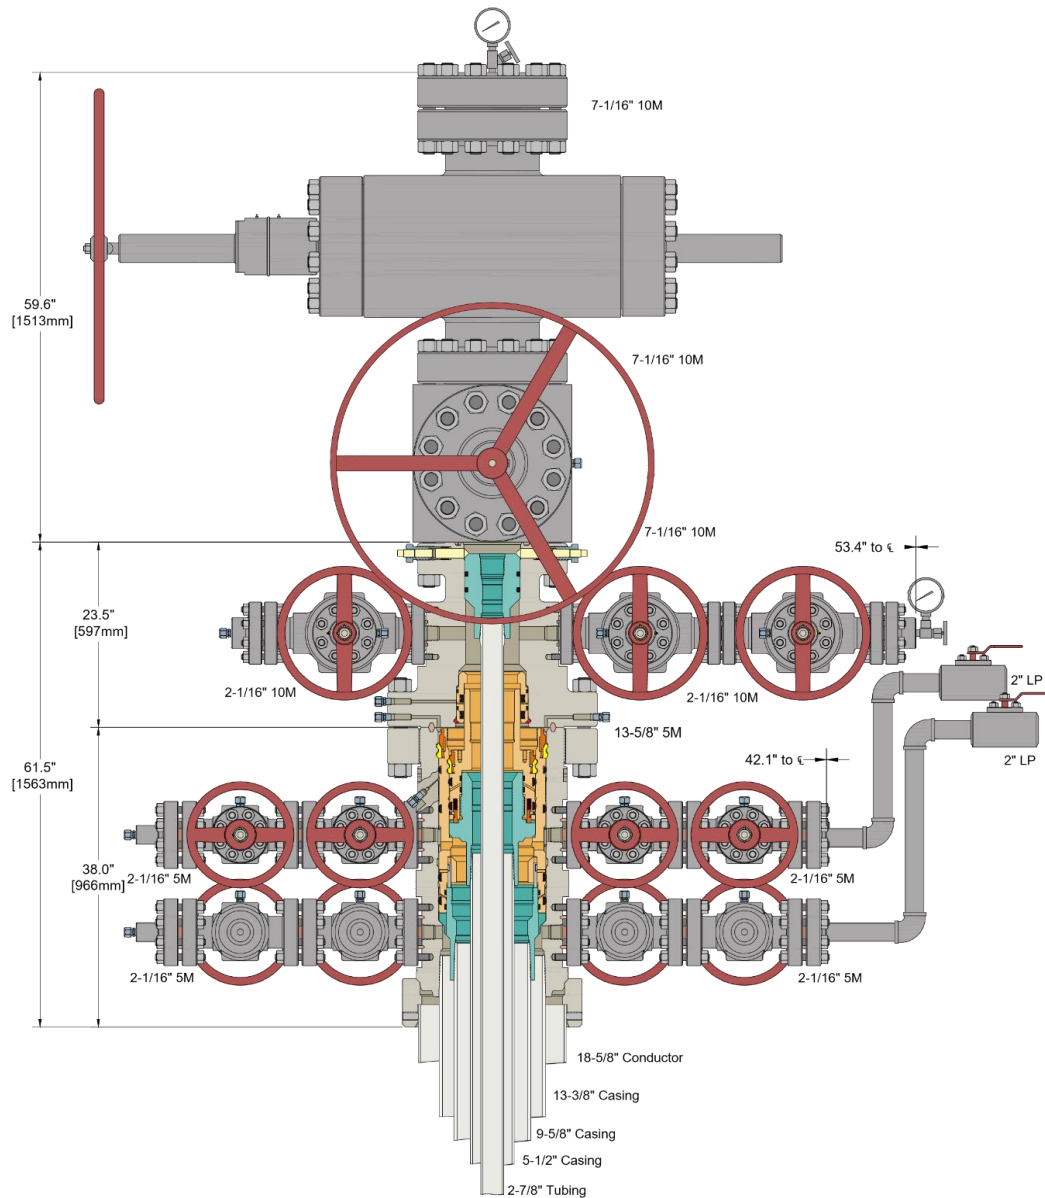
Velkerri 76 S2-1 installed wellhead equipment schematic (13-5/8" 5M RSH-2 well head assembly with 7-1/16 10M tree)
